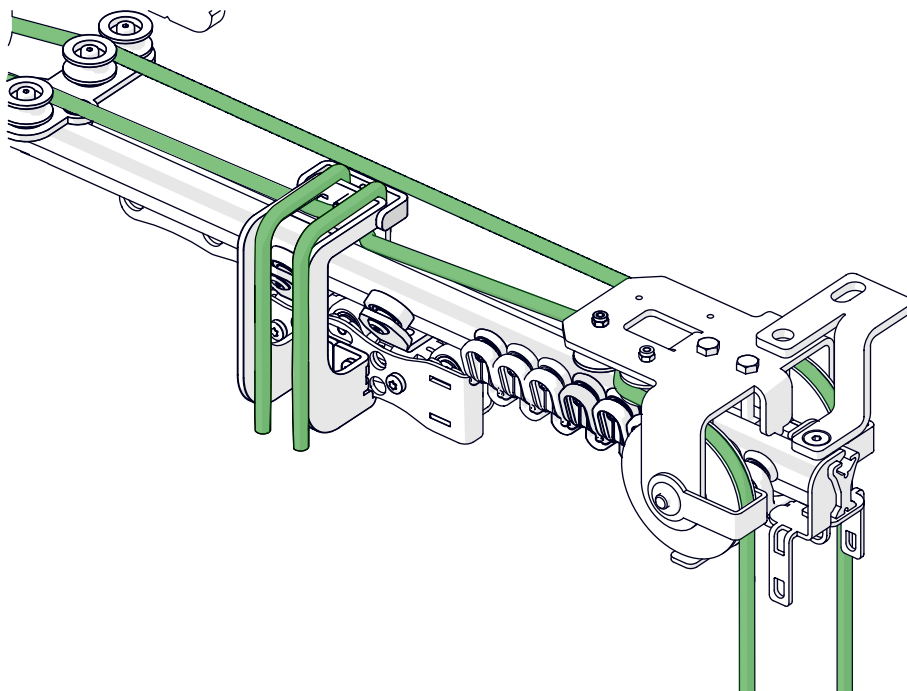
Top cord operation – Final cord routing at the head pulley and clamping of the loose ends
